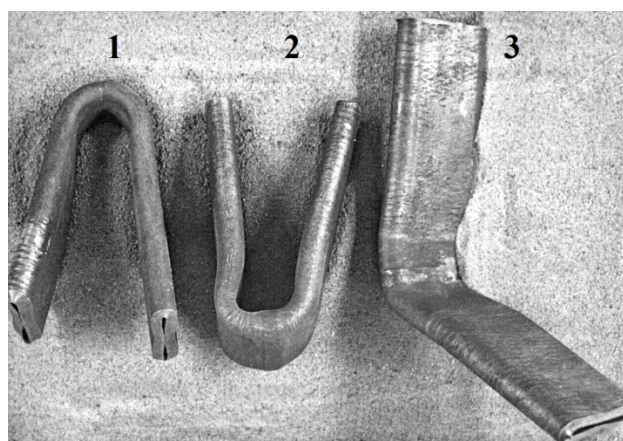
Welded pipe joints after flattening + bending test:
